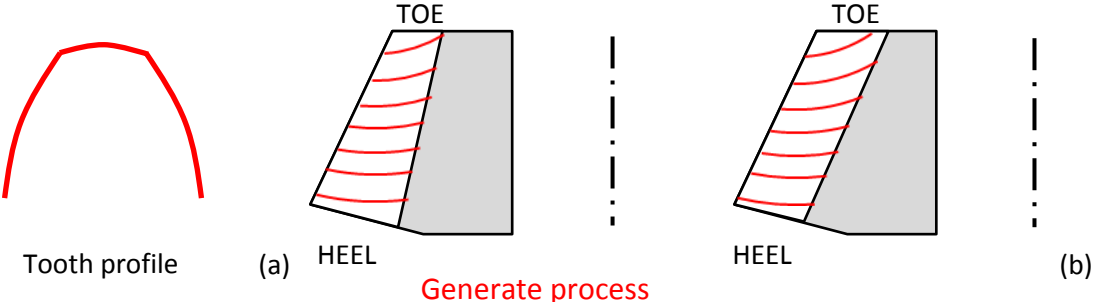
Generate tooth profile and cutting grooves for (a) face-milled and (b) face-hobbed process
